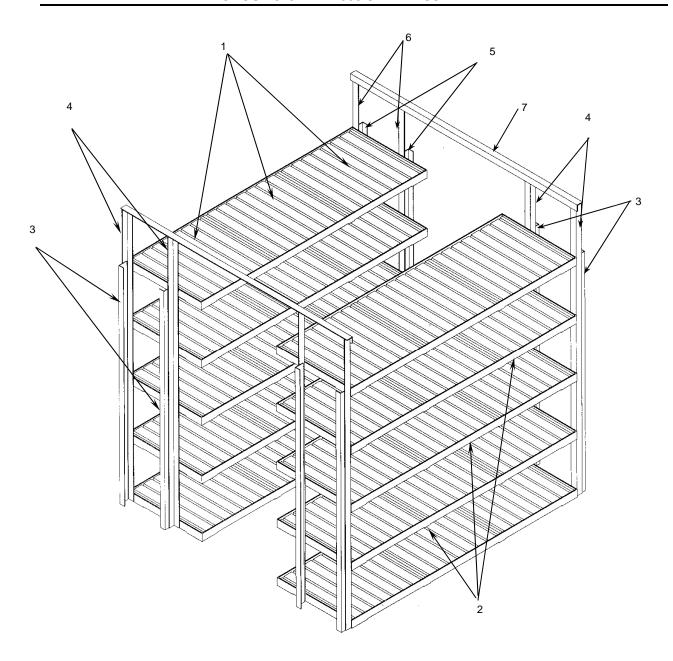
ADR-300 Shelf Assembly (Sheet 1 of 2).
